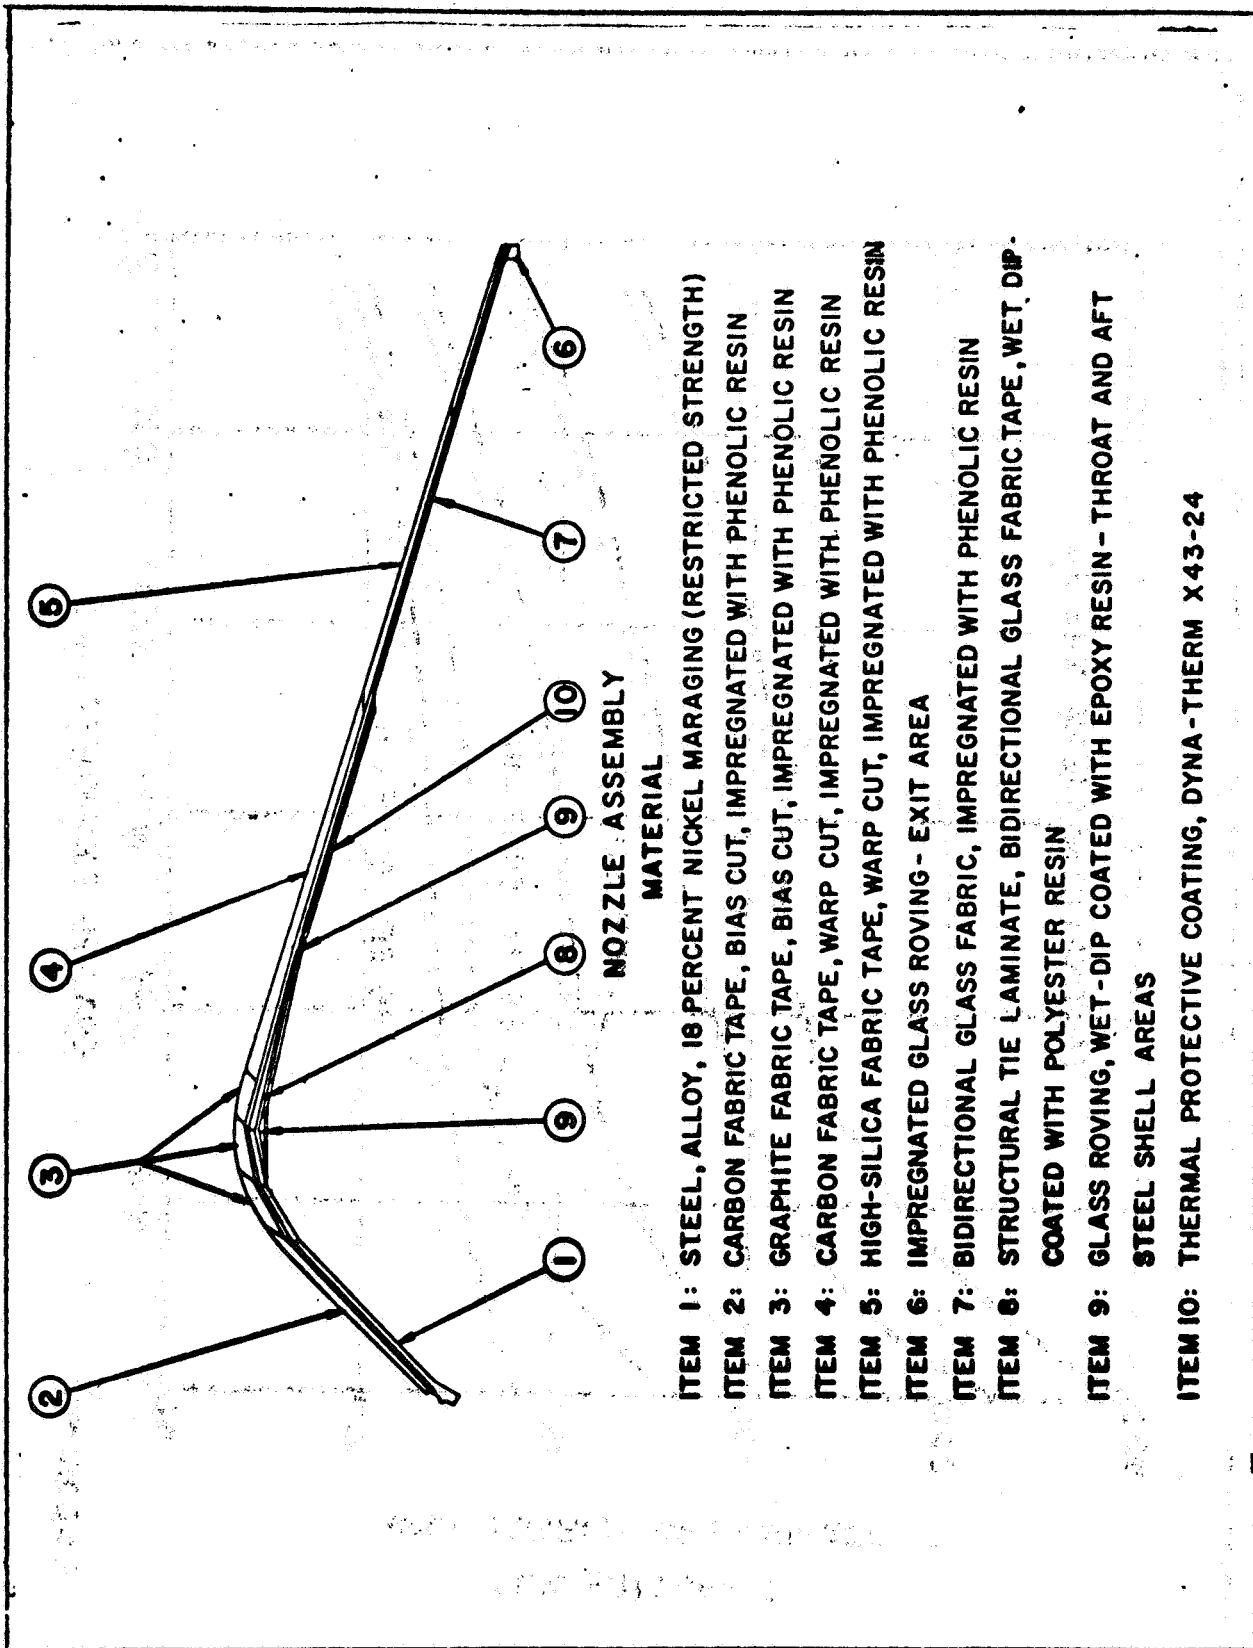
Cross-Sectional View of Nozzle Assembly of Motor 156-2C-1 Showing Materials.
